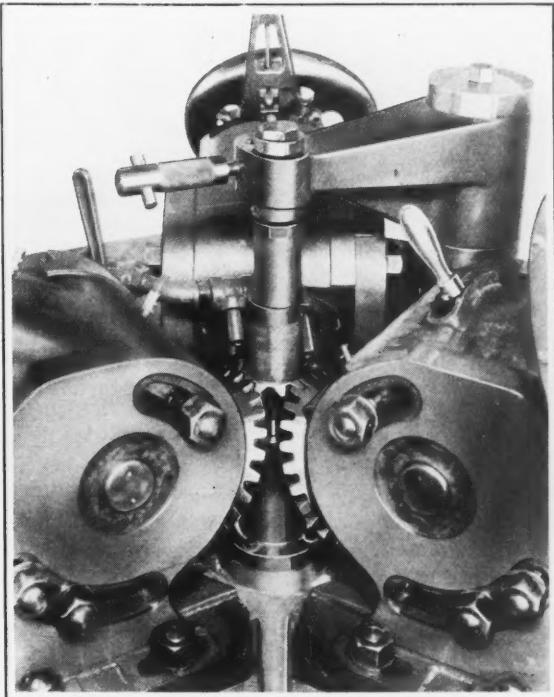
Close-up View of a Burnishing Operation on a Spiral-bevel Pinion
